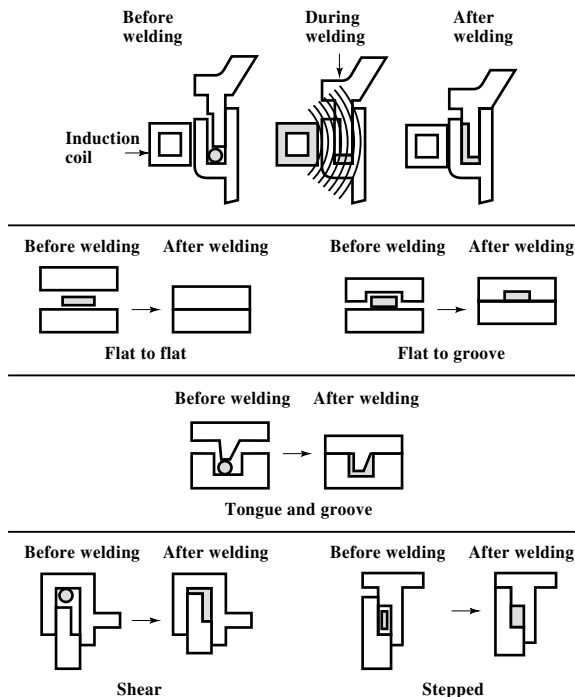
Typical Joint Designs Used in Induction Welding of Plastics Materials
